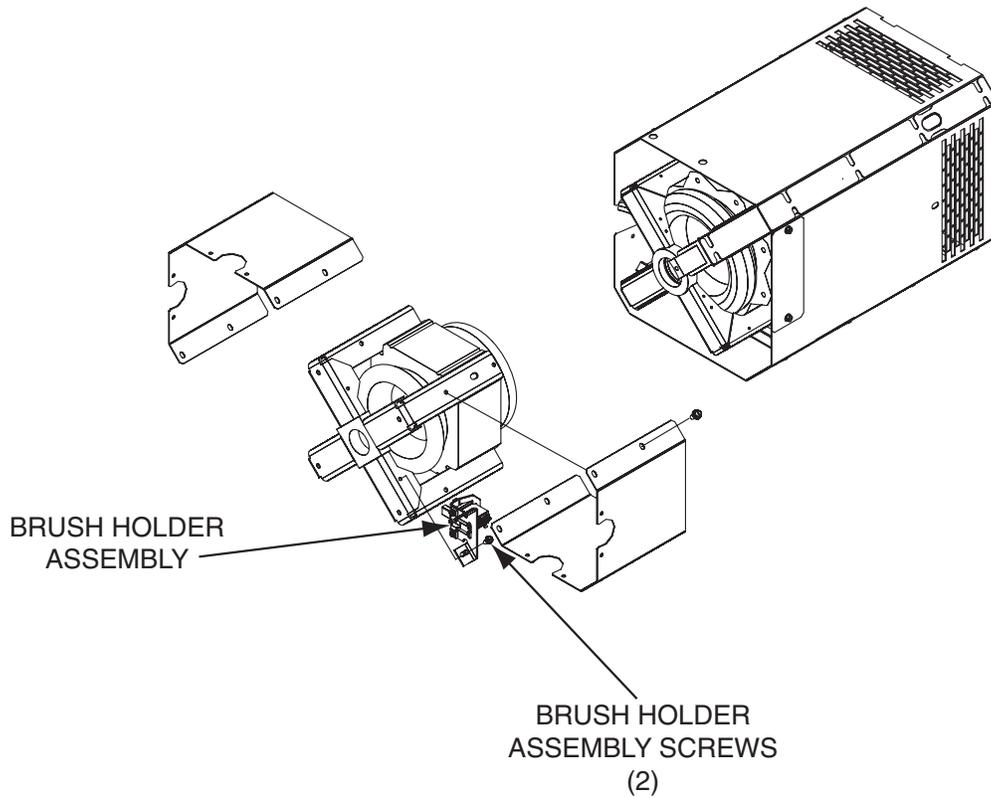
BRUSH HOLDER ASSEMBLY REMOVAL
